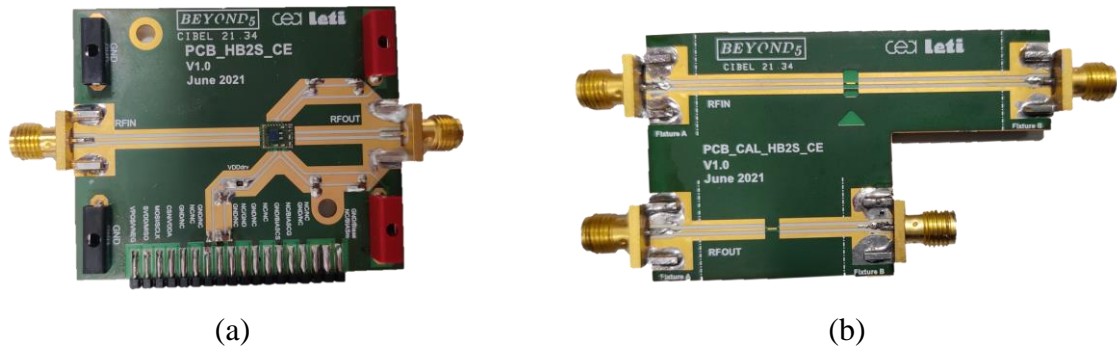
(a) Fabricated PCB with mounted IC and package (b) PCB access lines test structure.
